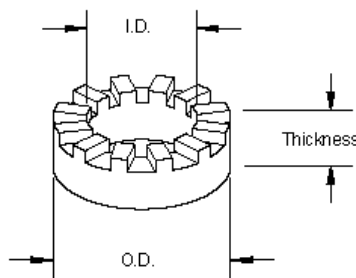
Crevice Insulator Washer, courtesy of Metal Samples Company (www.metalsamples.com)
